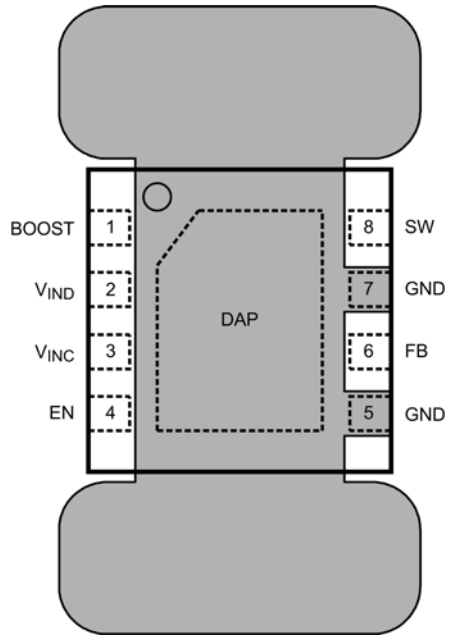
8-Lead LLP PCB Dog Bone Layout
